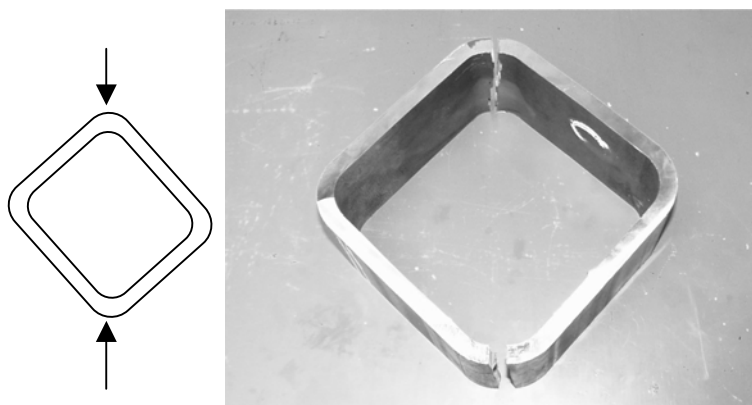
Straight crack paths were found in a small scale specimen cut from CFHS tubes subject to compressive external loading.
